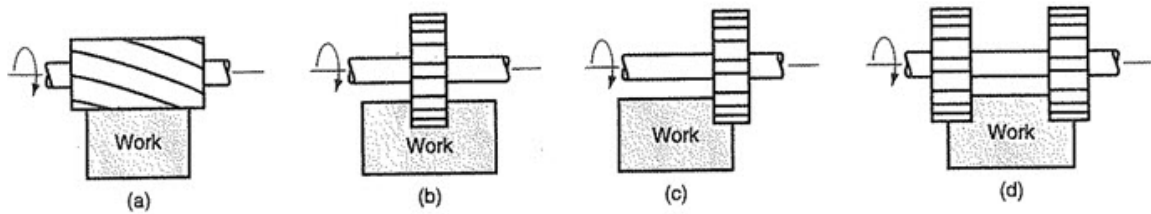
Peripheral milling: (a) slab milling, (b) slotting, (c) side milling, and (d) straddle milling.
